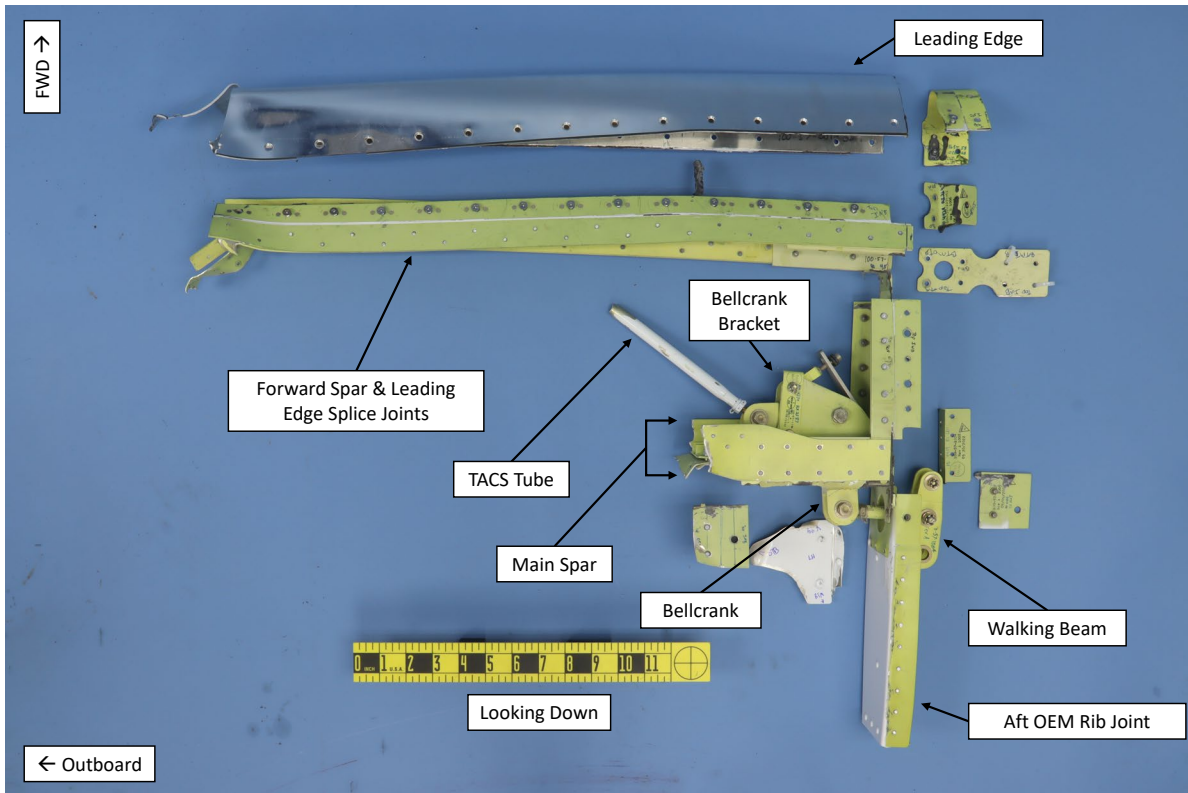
A photograph showing the pieces received from the wing extension assembly.
